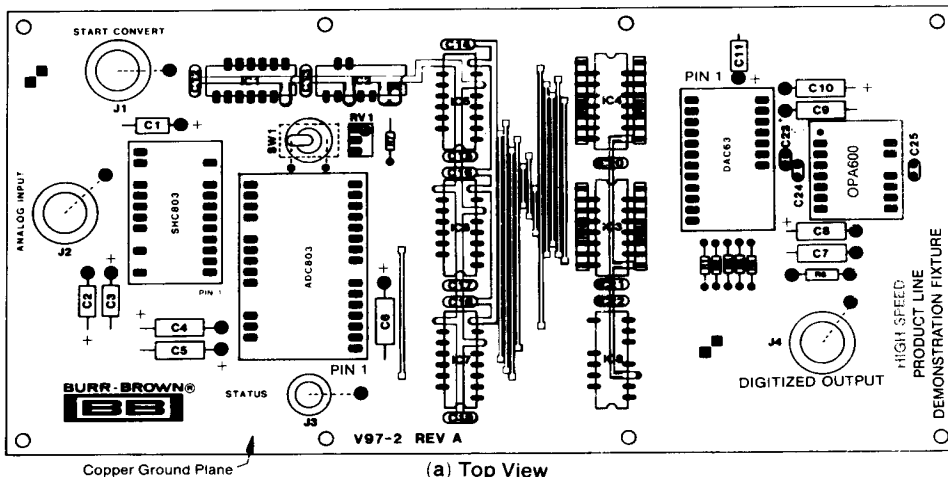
PC Board Layout for Beat Frequency Test Fixture.
